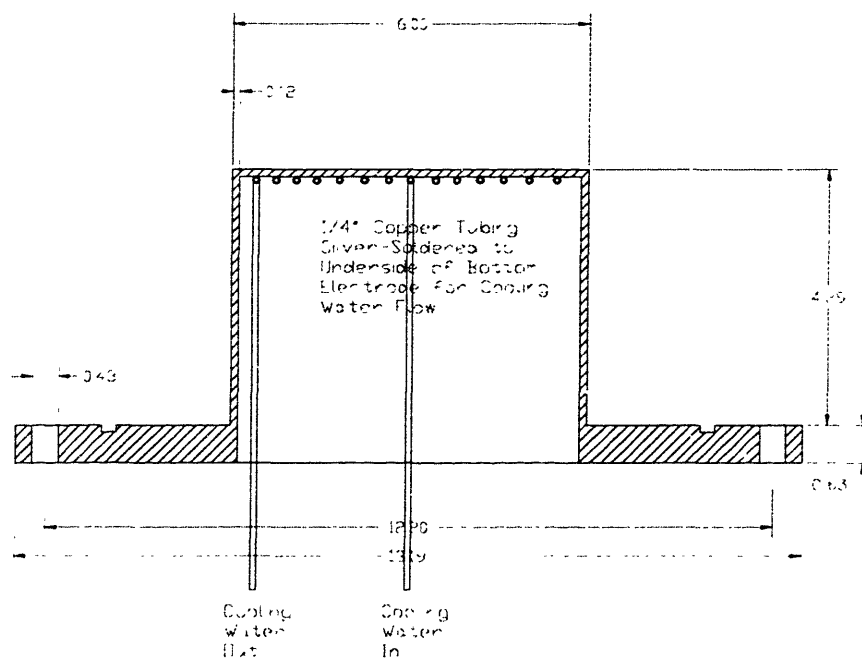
Side cutaway view of original design of bottom plate. Note that copper tubing was replaced with a stainless steel reservoir 1-in. deep with inlet and outlet tubing in final construction.
